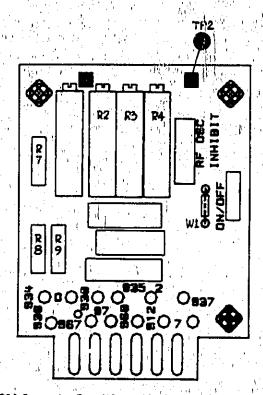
P/O A3A4 Connector Board Assembly Component Locations (P/O CHANGE 36)
